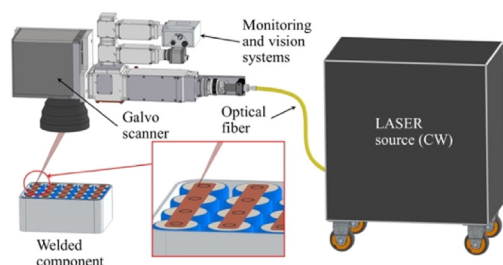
Schematic of a laser welding process for battery module assembly.
